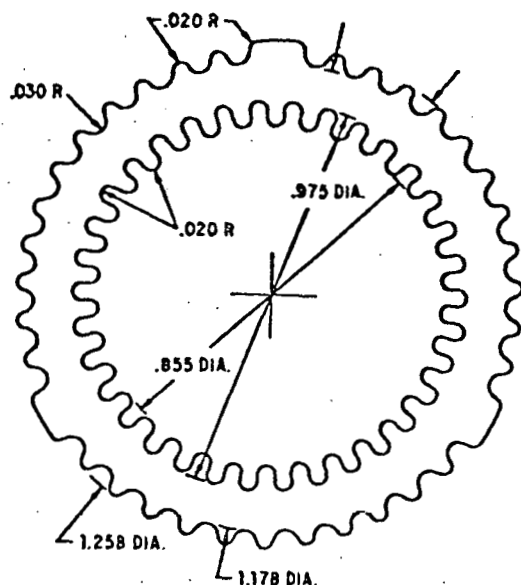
Cross section of C-MU fluted condenser tube (all dimensions in inches).
